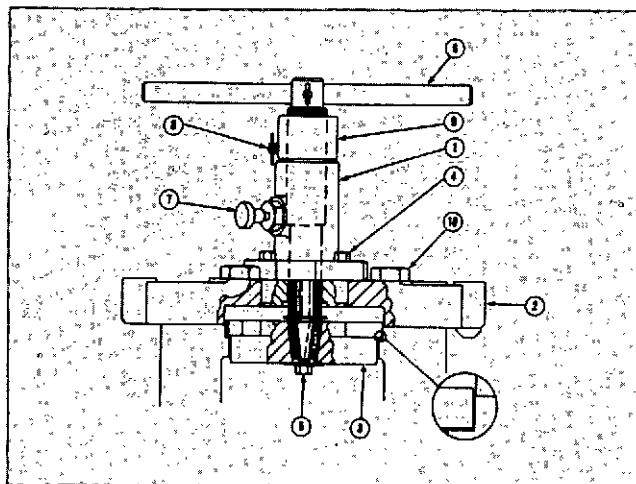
, V40156. ST-1059 Counter bore tool
